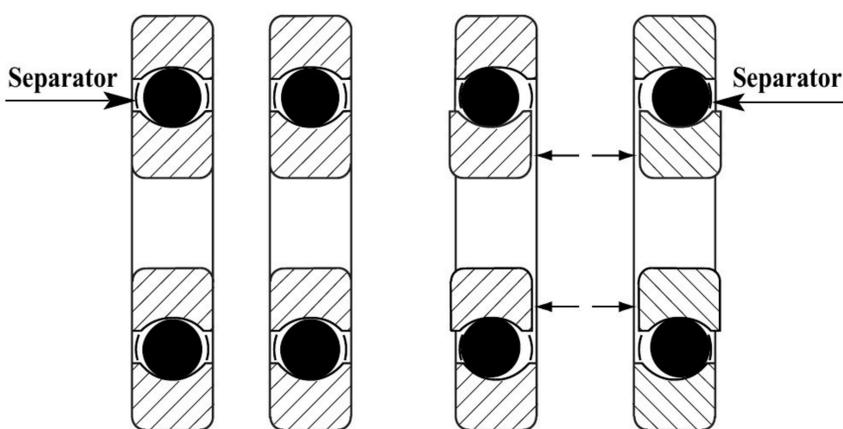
If the S.R.E. bearing is not recessed in alternators using metal or first-style plastic tolerance rings, it will be destroyed when the rotor heats up and expands.
